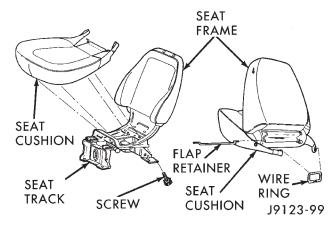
Flap Retainer, Wire Ring and Seat Cushion Removal/Installation
